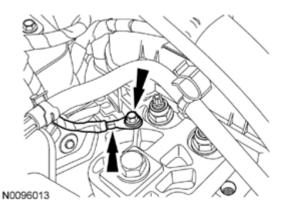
Locating Engine Mount Ground Wire And Nut Courtesy of FORD MOTOR CO.
